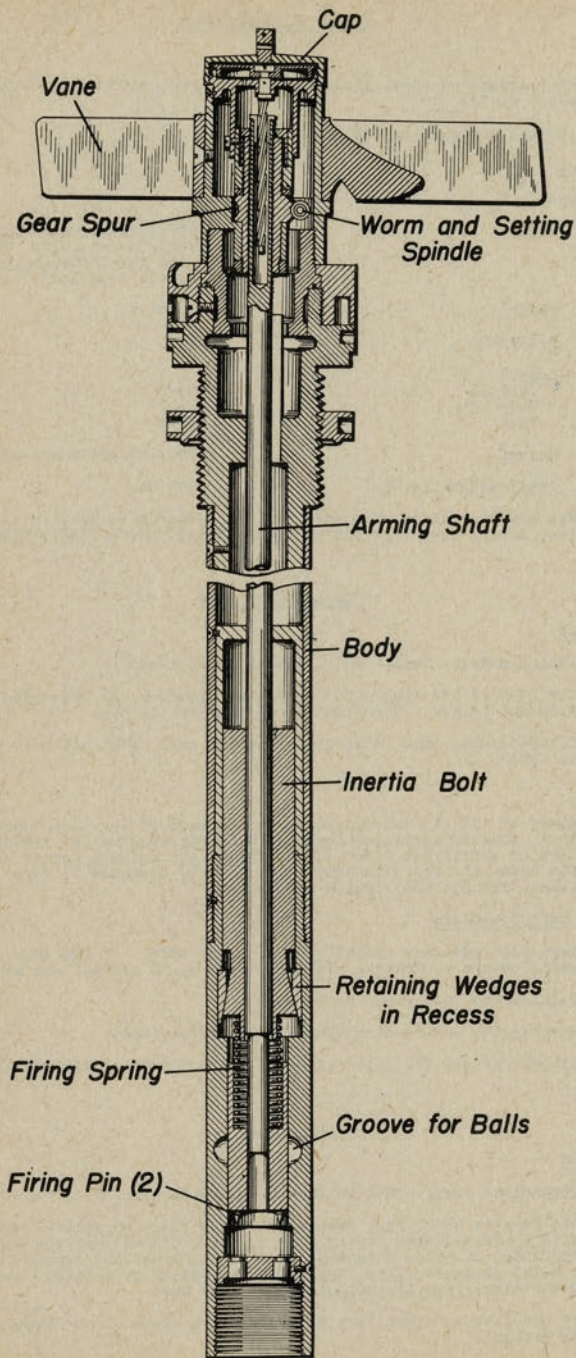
160/C.S. Depth Bomb, Tail Fuze, Armed Position, Sectional View
